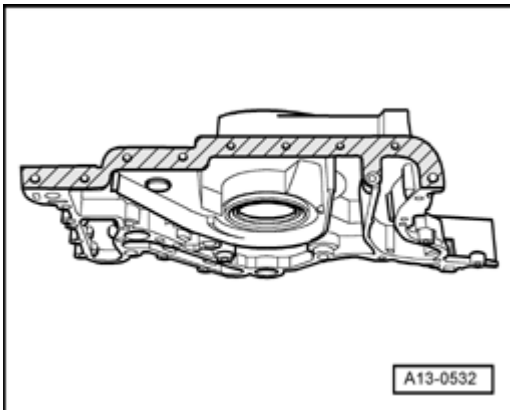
Thinly Coating Lower Sealing Surface At Sealing Flange With Silicone Sealant
